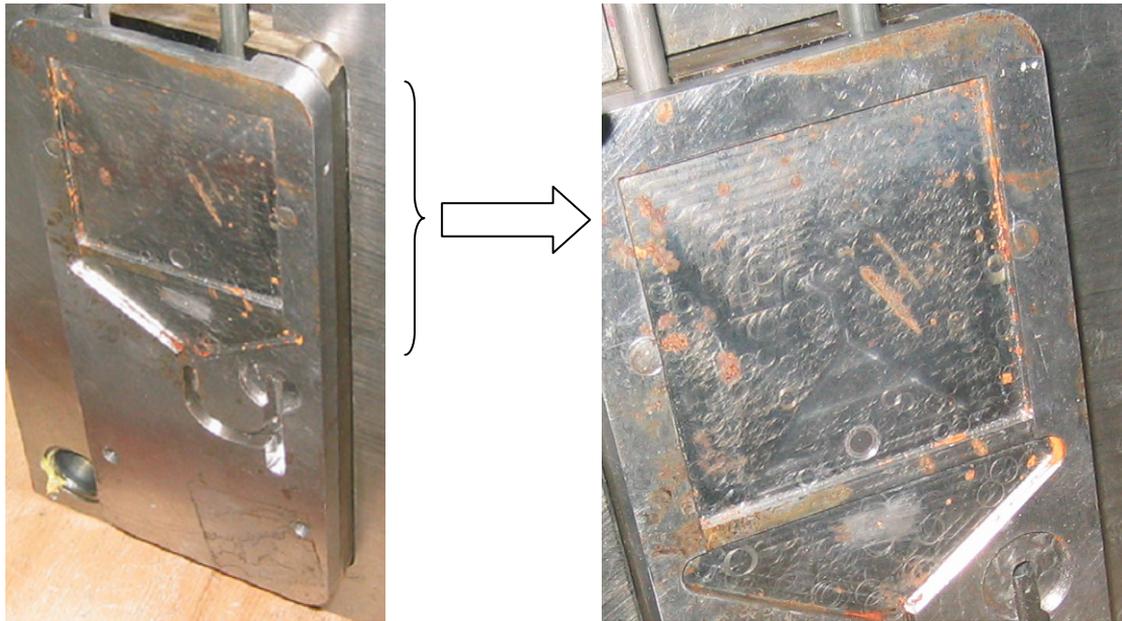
A closer look on the (corroded) injection mold engraving insert's front side.
